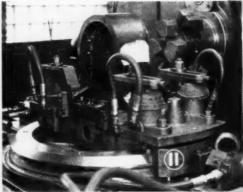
shows the milling of reducer shaft keyways. Two keyways are milled at a time with a double head on a Kearney & Trecker Milwaukee No. 4. A spindle speed of 2600 rpm is used. Both spindles operate concurrently.
